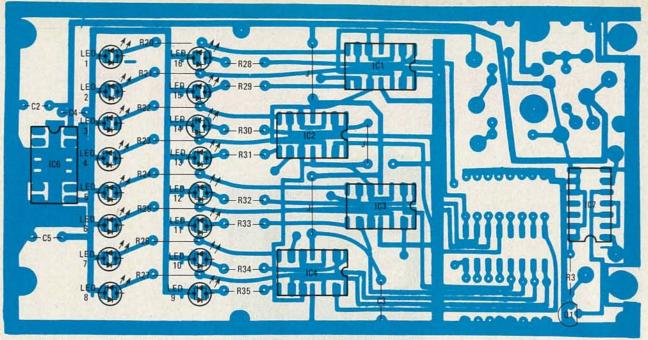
PARTS PLACEMENT on "component-side" of display board. Note that foil pattern shown is on side of board opposite the one on which components are mounted.
